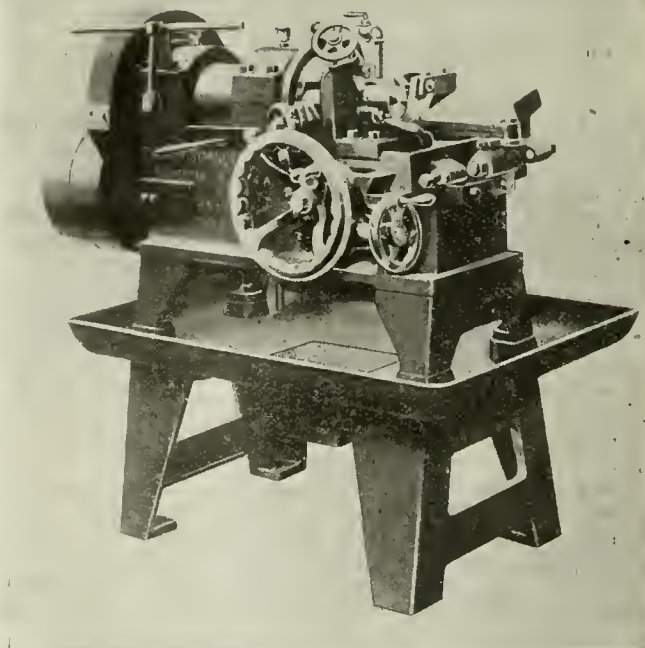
GROOVING MACHINE WHICH GROOVES, WAVES, AND UNDERCUTS COMPLETE.
